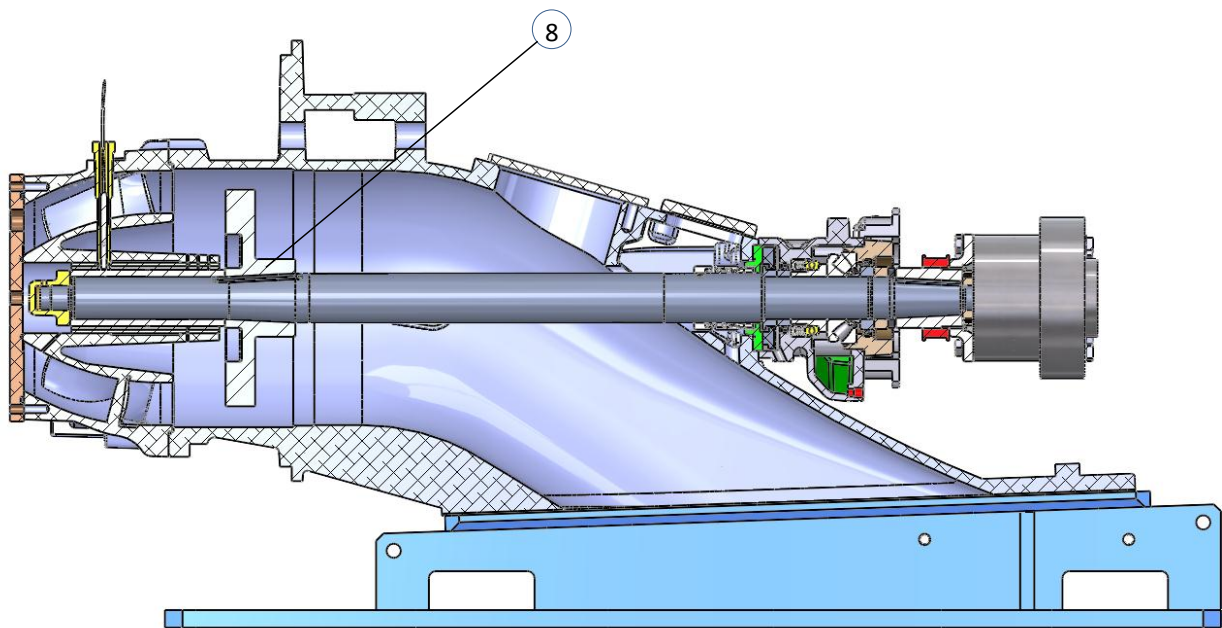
Cross Section of the HJ364 Water Jet Assembly Test Rig
